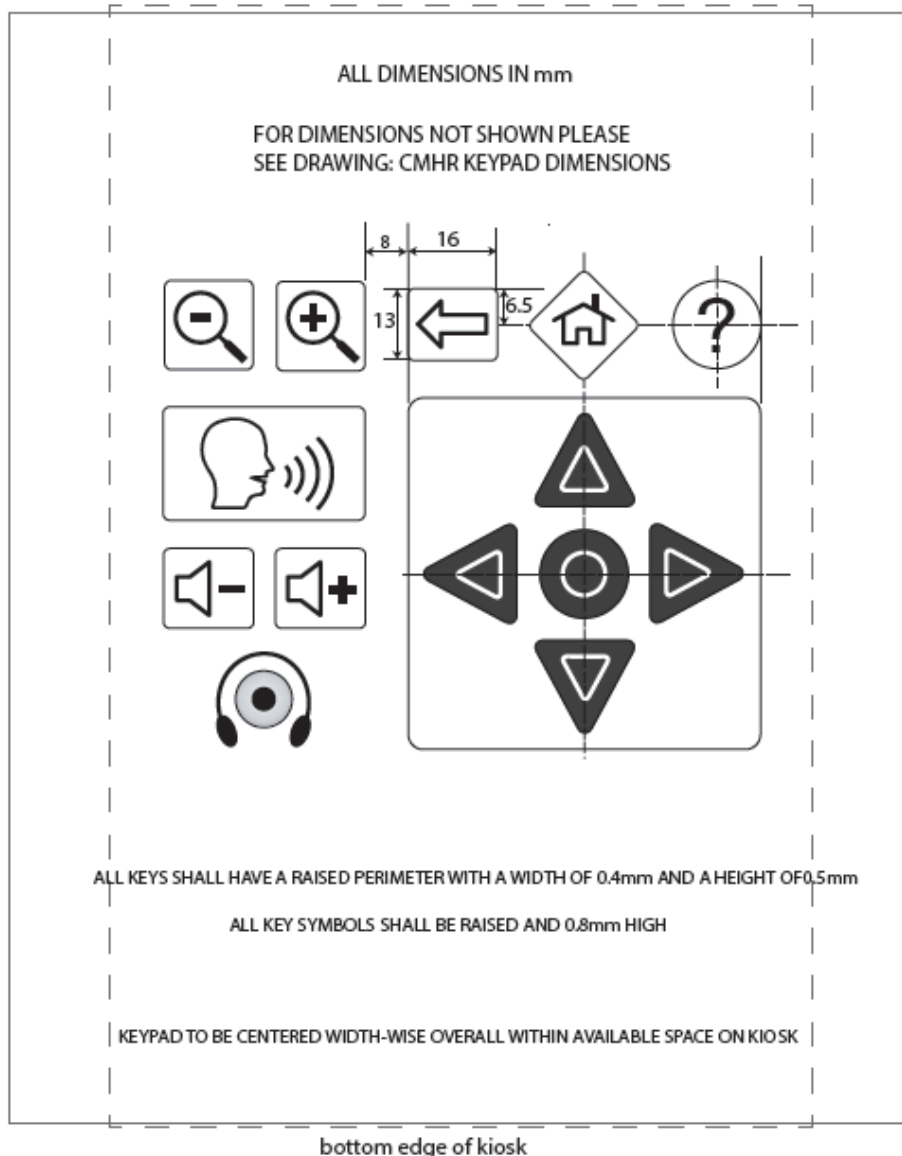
Final keypad dimensions and layout on the kiosk (keypad with a back key).
